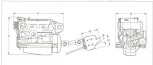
Engine with standard economy equipment, including coupler and gearbox (in line)
